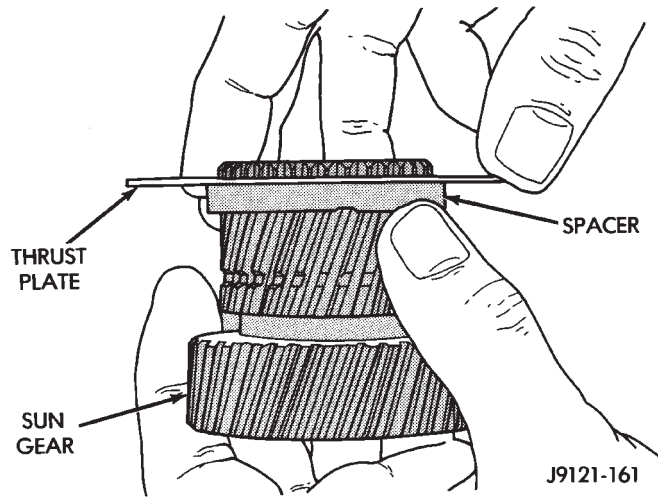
Installing Driving Shell Front Thrust Plate On Sun Gear
